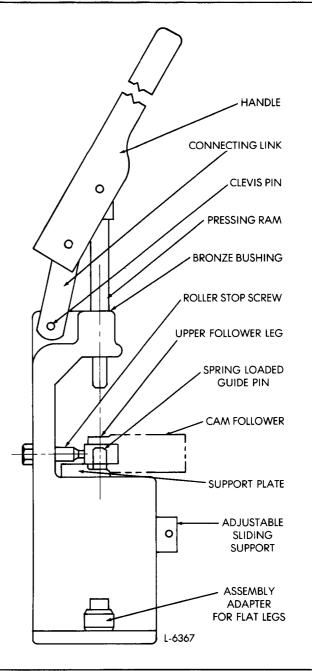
Removing or Installing Cam Follower Roller using Tool J 33421
